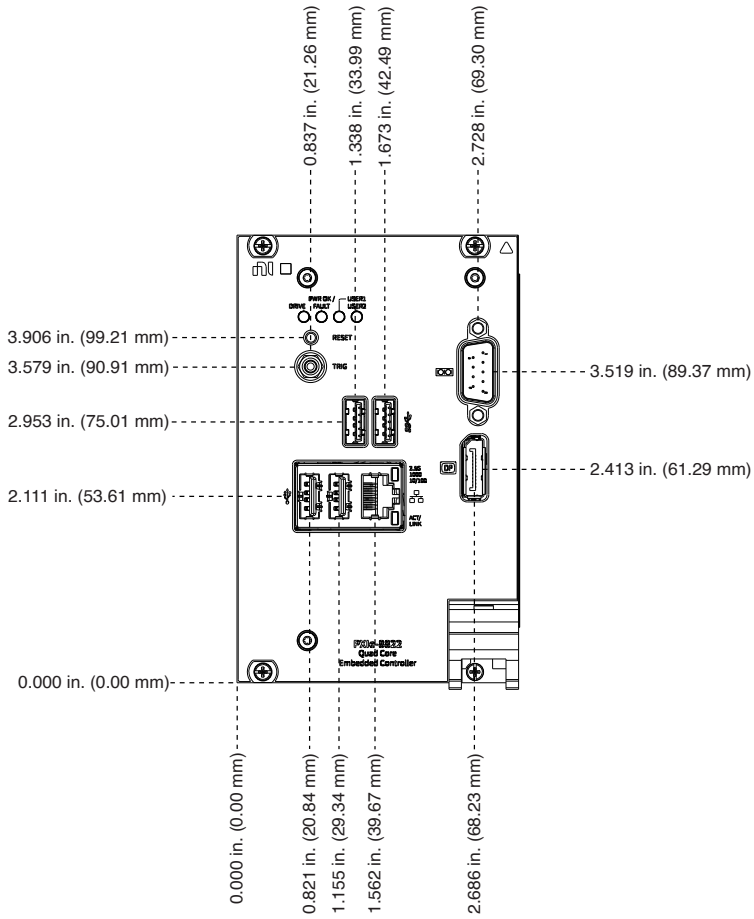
PXIe-8842 Front Panel Layout and Dimensions
